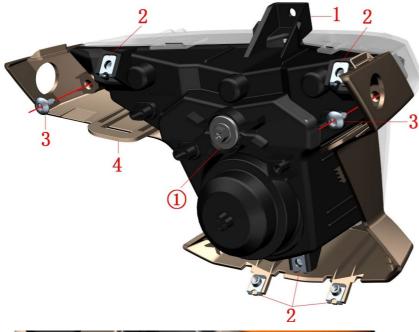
FRONT FORK		Front light assembly	CHK	(2)
